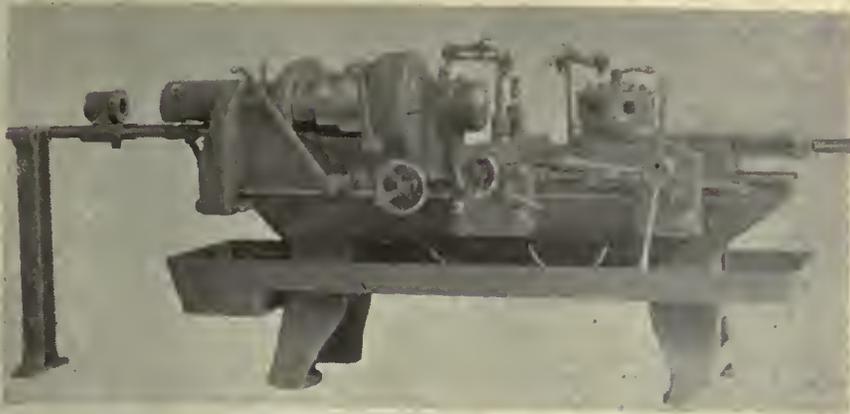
NO. 7 SCREW MACHINE—FRONT VIEW.
